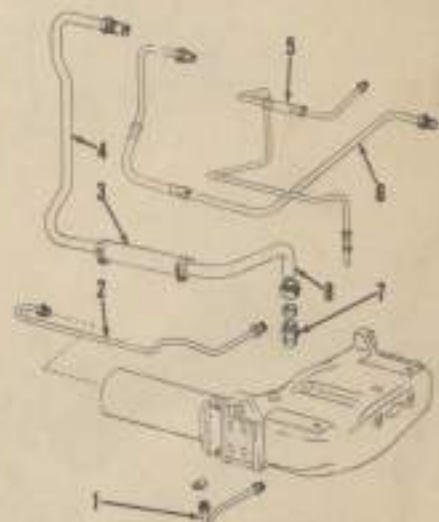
A—Exploded view showing general layout of power steering tubes used on D-17 diesel models of tractor Serial No. D17-38964 and up.
